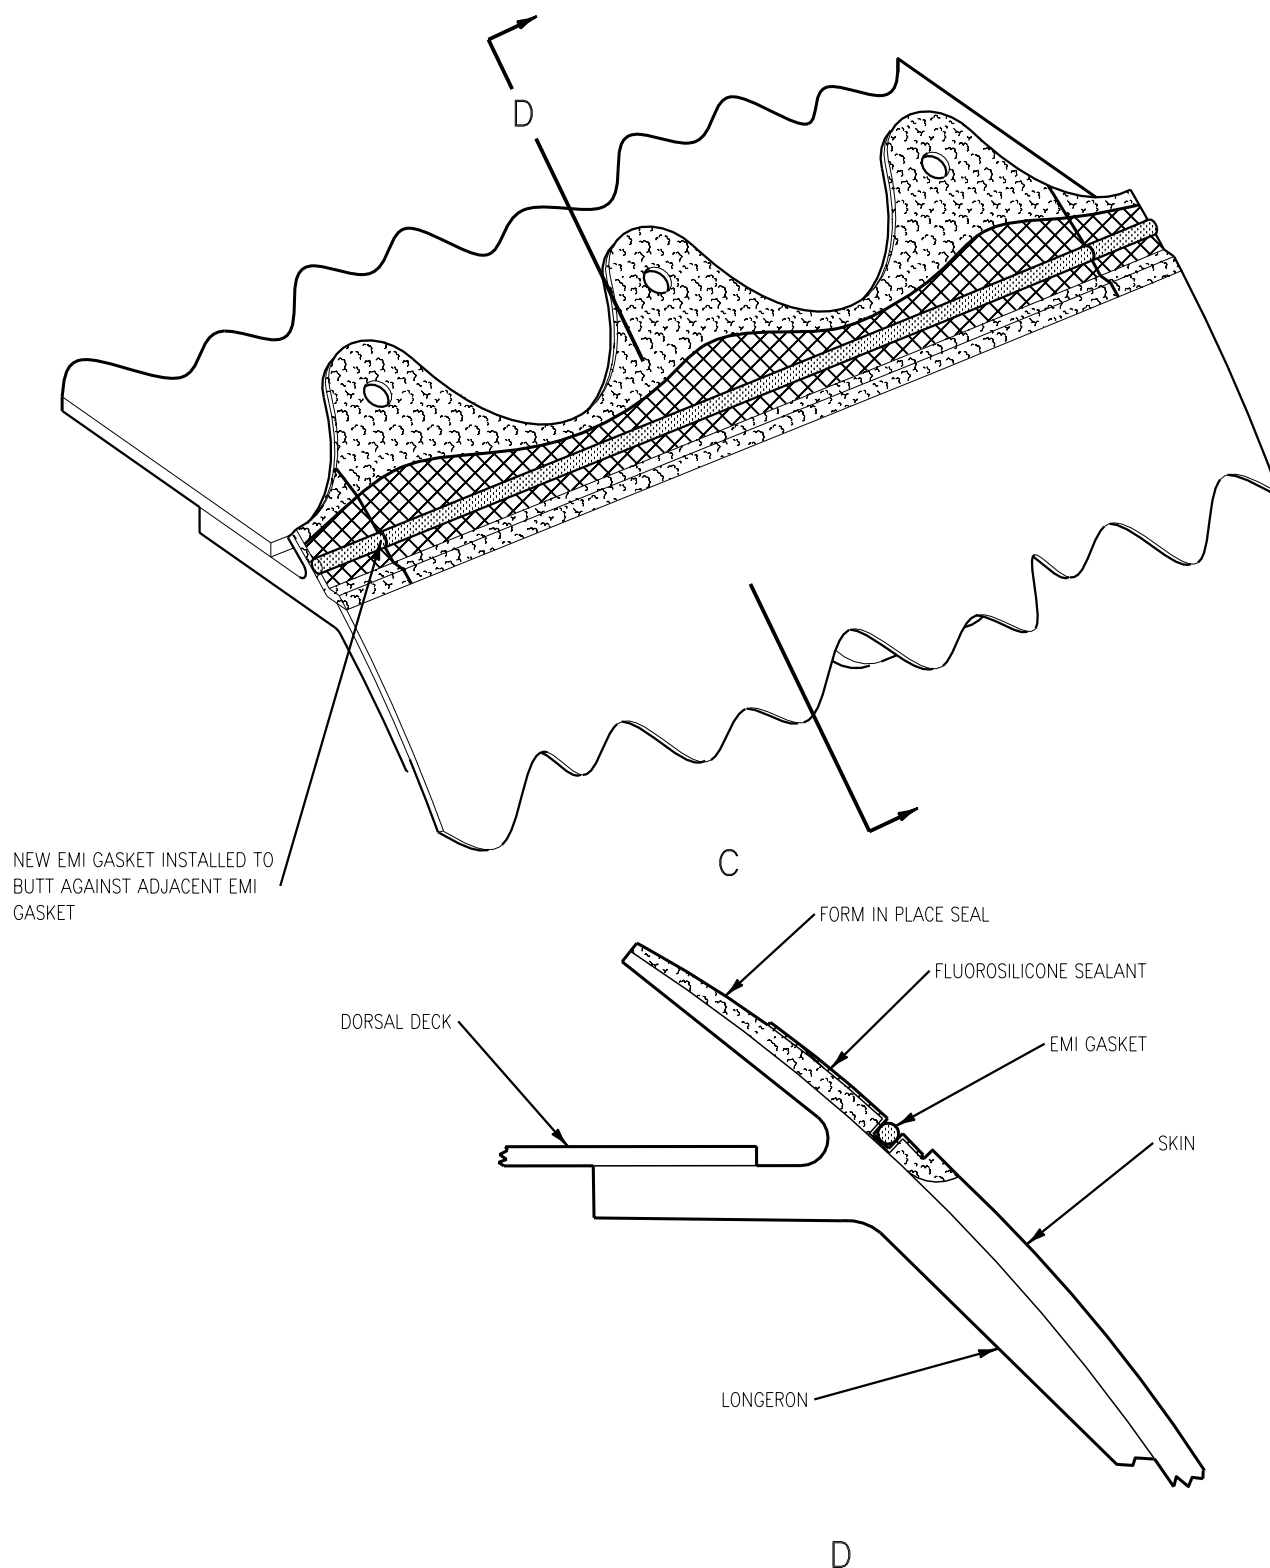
Form In Place Seal Damage More Than 0.80 Inch (Sheet 4)
